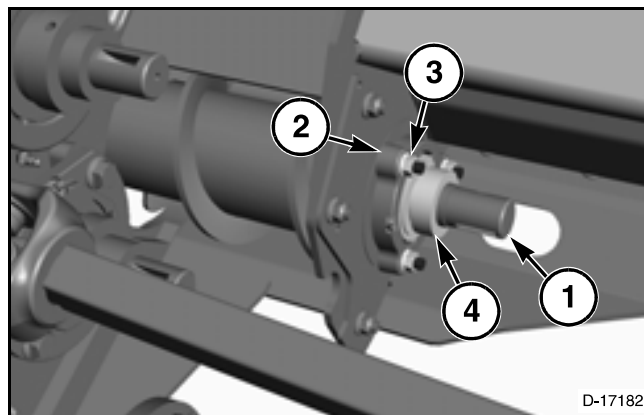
Remove any paint, corrosion or burrs from the shaft (1) of the helper roll.
